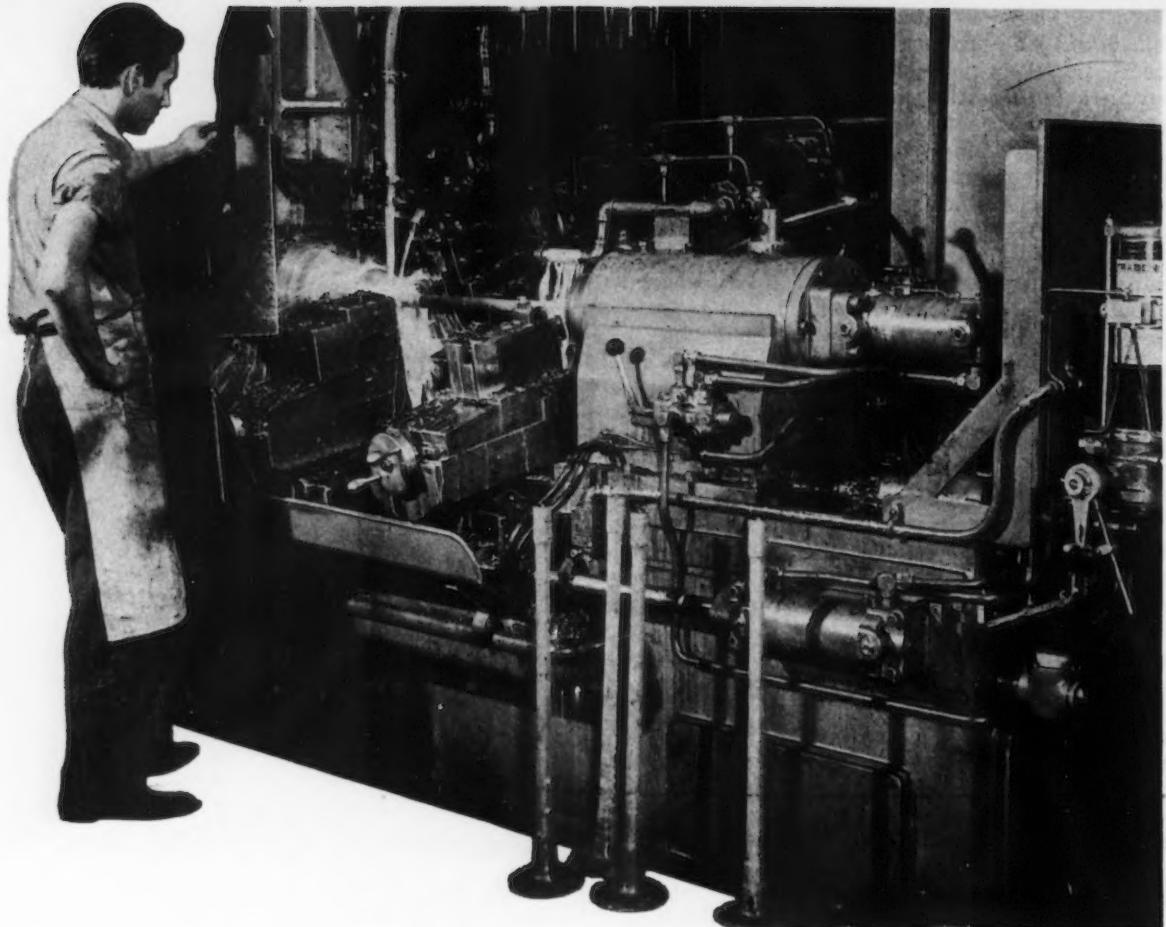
Coolant delivery, as well as the operating setup of the machine, are shown here. Coolant delivery methods are being closely examined in the light of higher cutting speeds.
